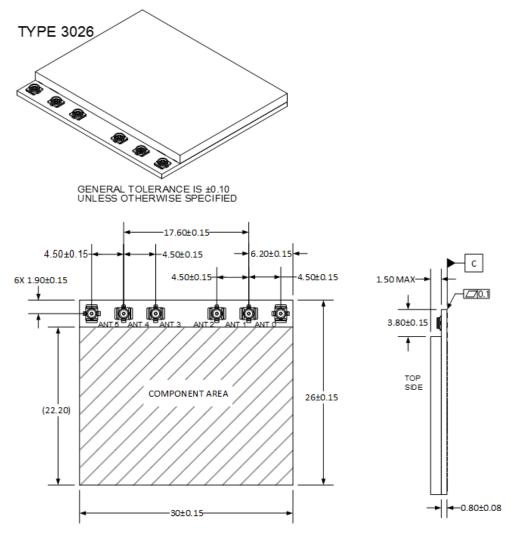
M.2 Type 3026-S3 Mechanical Outline Drawing Example
